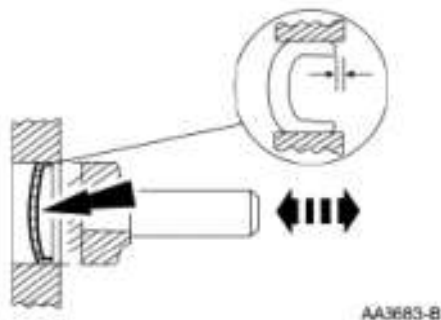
Installing Core Plug Using Freeze Plug Installer - Cup-Type
